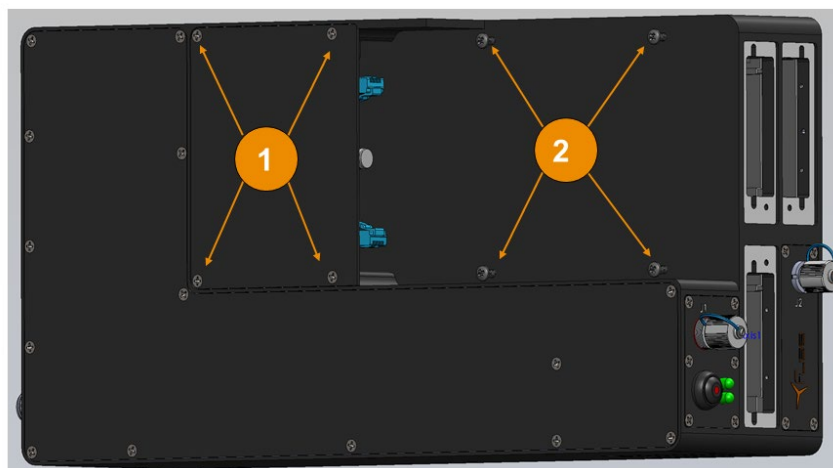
Diagram of Encryptor Mounting Screws on CORE
